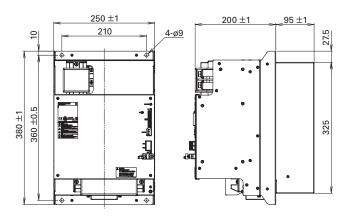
Dimensions (Amplifier units 300 and 600 A)
